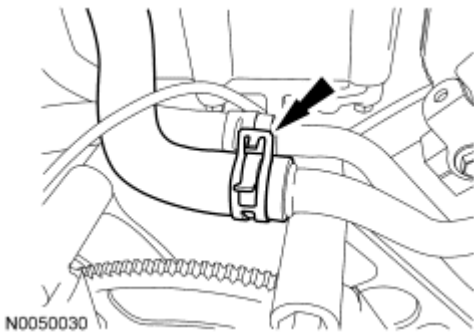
Disconnecting Intake Manifold-To-Coolant Tube Assembly Hose
